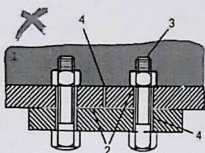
Exposed bolt ends and nuts in the product zone (1) are not allowed because they give rise to metal-to-metal contact corrosion (2), exposed threads (3) and crevices (4). Debris also tends to adhere to and around fixings and provides nutrients for microbial slime growth. Exposed threads should be cut to the correct length or preferably domed nuts should be used (Lelieveld et al., 2003; Hauser et al., 2004b).
